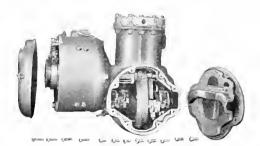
Motor-Driven Air Compressor, Type C.P.-27 with Covers Removed.
